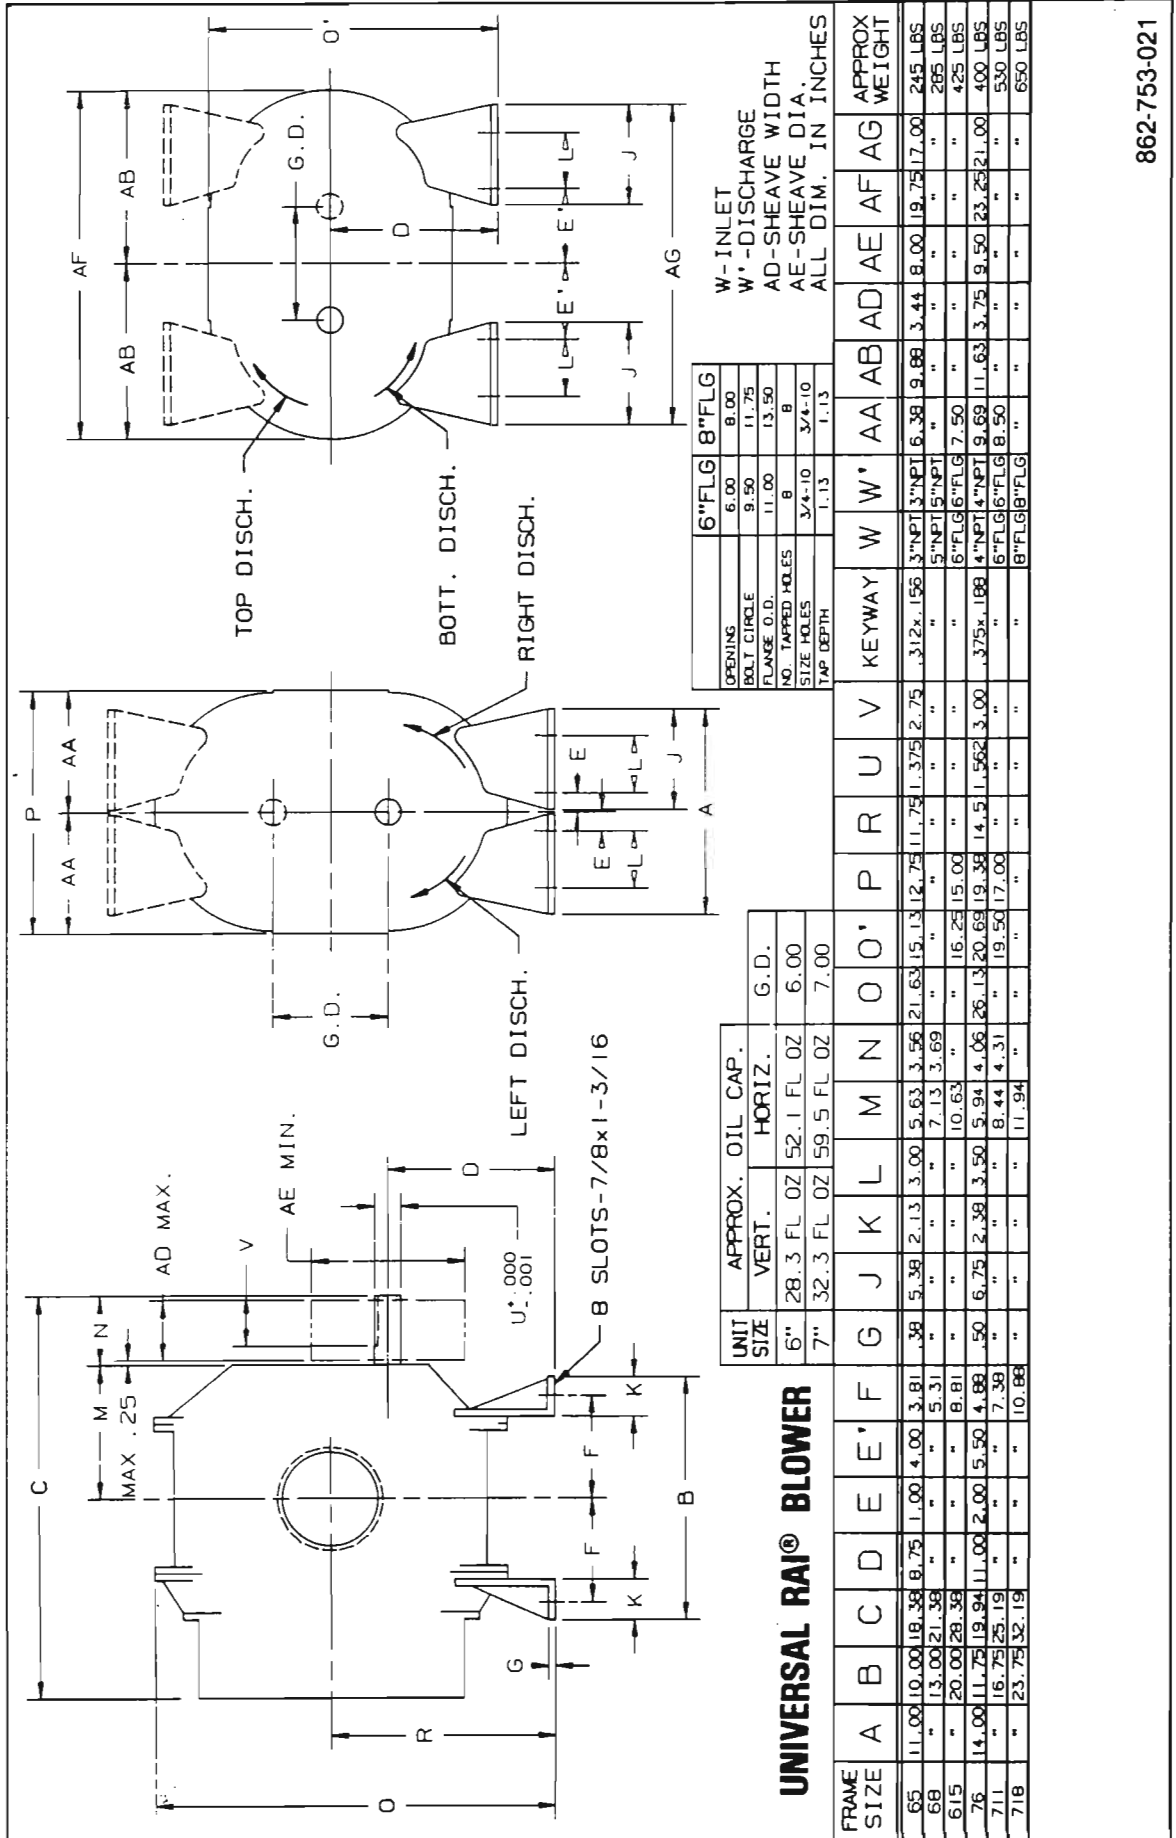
Assembly of UNIVERSAL RAI® Blowers, 6" and 7" Gear Diameter
